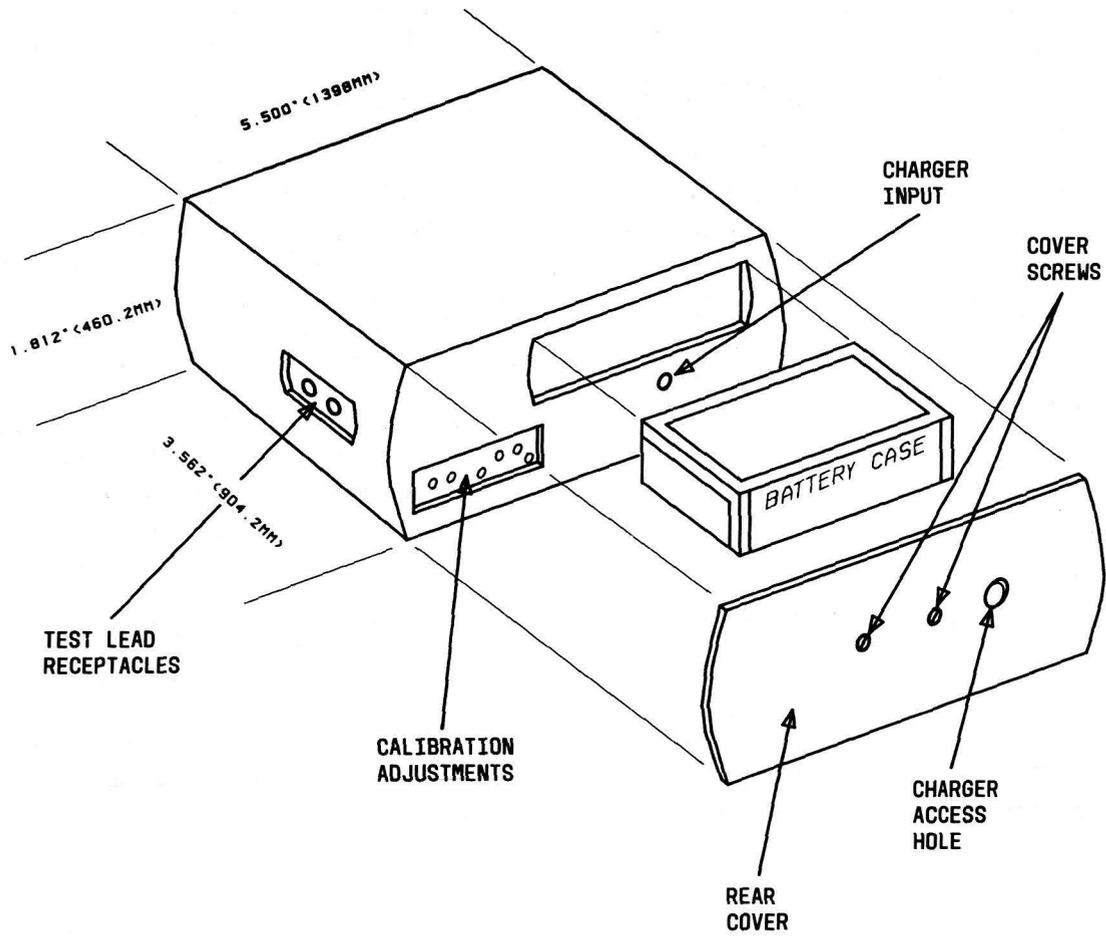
KS-20599, L4, Multimeter With Rear Panel Removed
